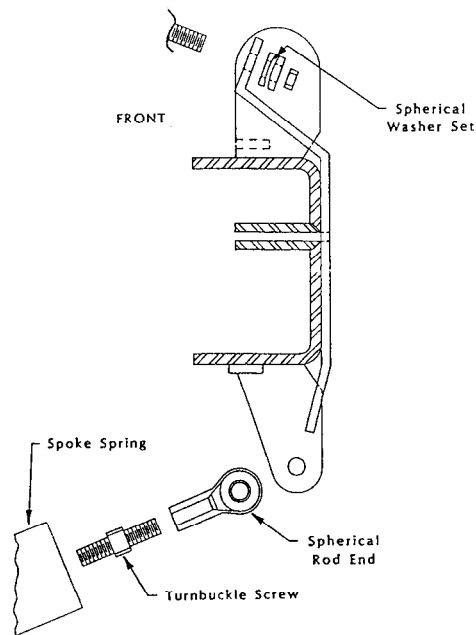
Cross Section of Dish Ring Showing Details of Outer Spoke End Attachment Bracket.
